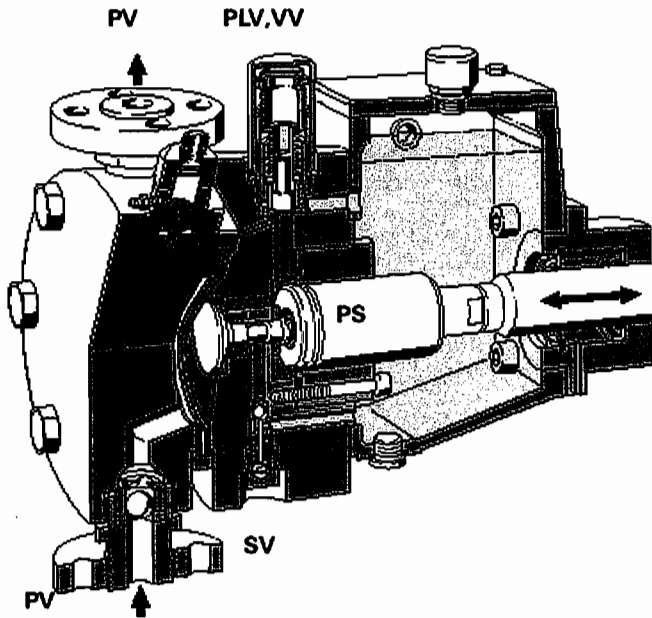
Cutaway of the PTFE Diaphragm Pump Head of Triplex Pump Used in Lab Tests.
